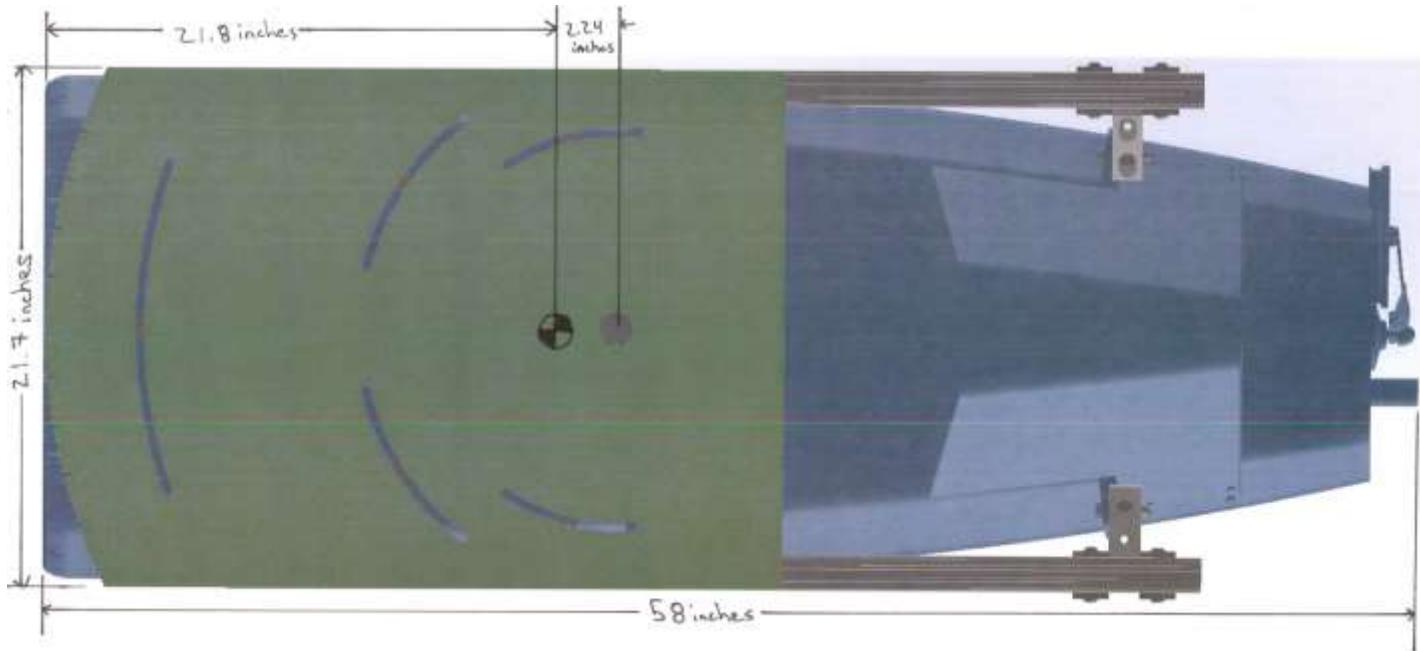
Bottom view of lidar and lidar mounting plate with connecting hardware.
